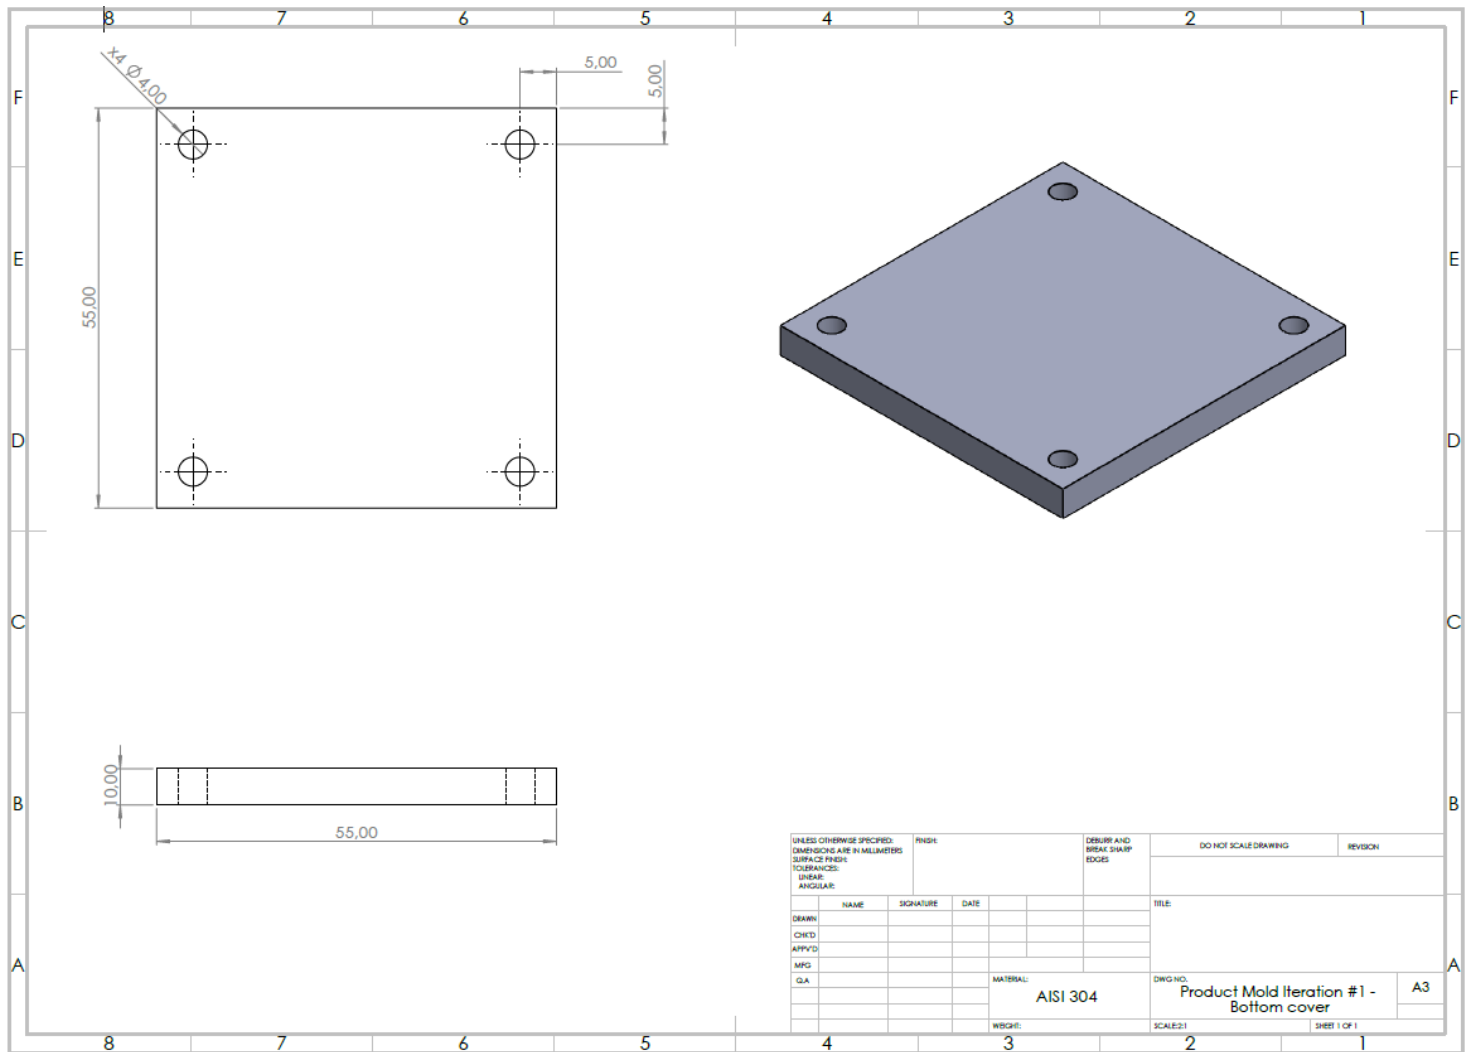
Rotation Knob Mold Iteration #1 – Bottom Cover
